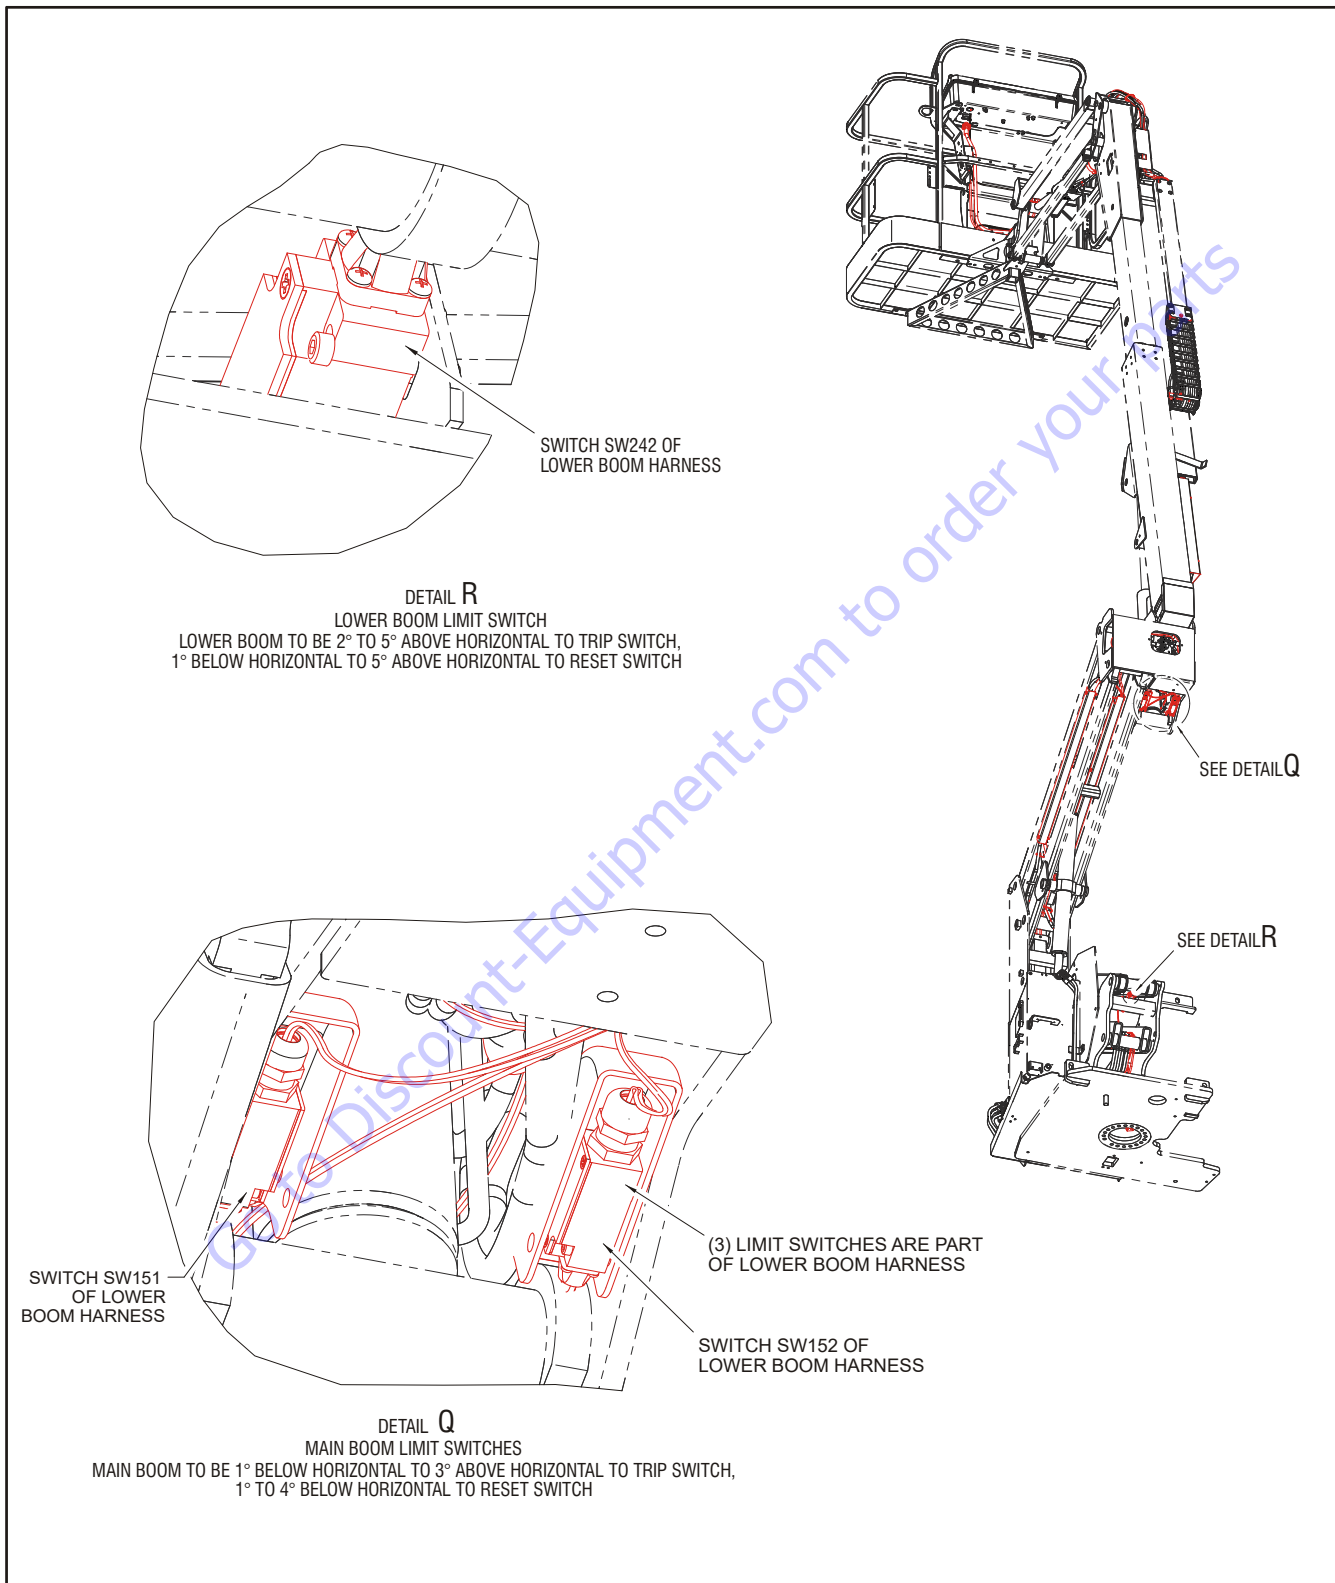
Cable Installation and Identification - Sheet 5 of 8
